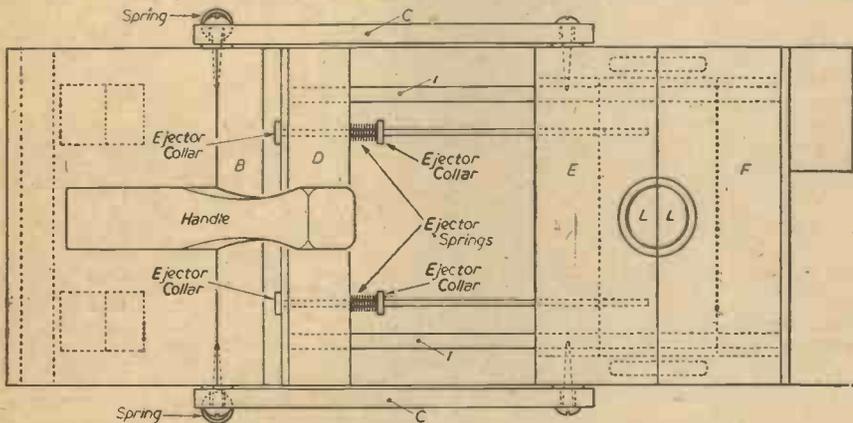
Plan view of the machine showing the ejector rods and springs.
